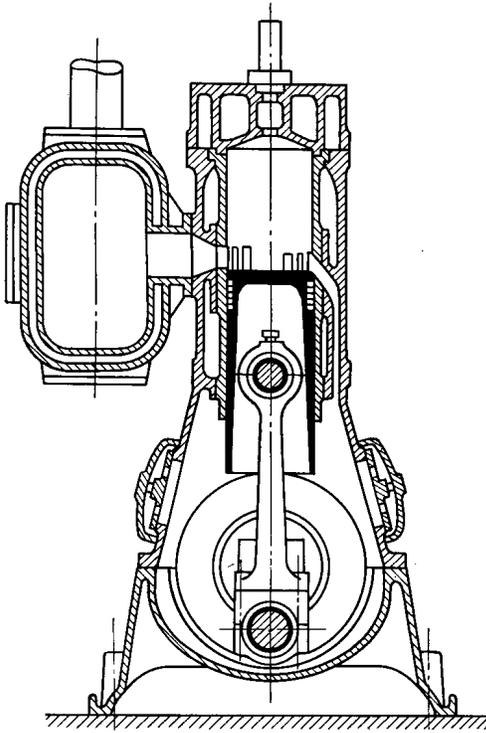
Crankcase-Scavenged Engine (Sulzer).
